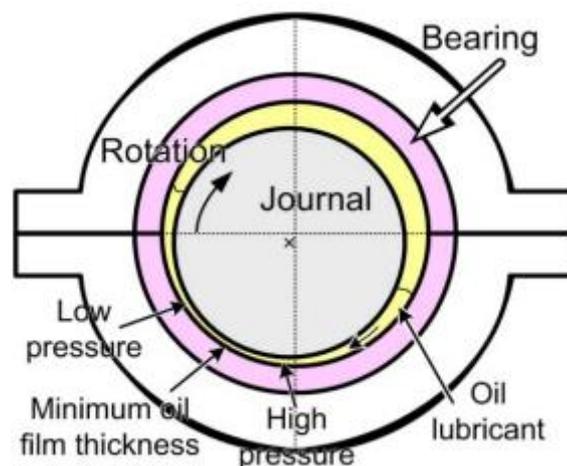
Schematic of the oil-lubricated journal (sleeve) bearing [23].
